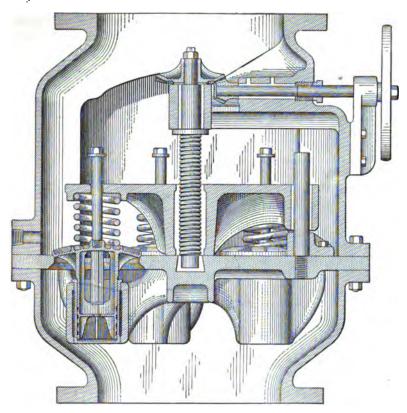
Cochrane Multiport Safety Exhaust or Back-Pressure Valve.
